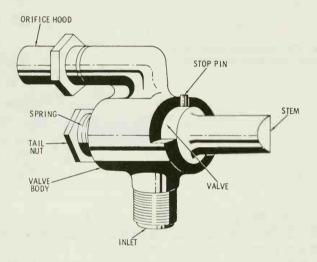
A typical single-duty plug-and-barrel gas valve.
